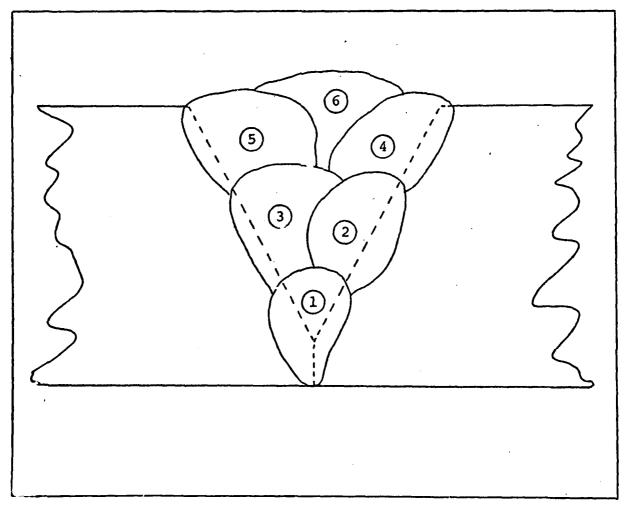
APPROXIMATE SHAPE OF WELDING PASSES PERFORMED FOR THE JOINING OF THE TWO CYLINDERS
